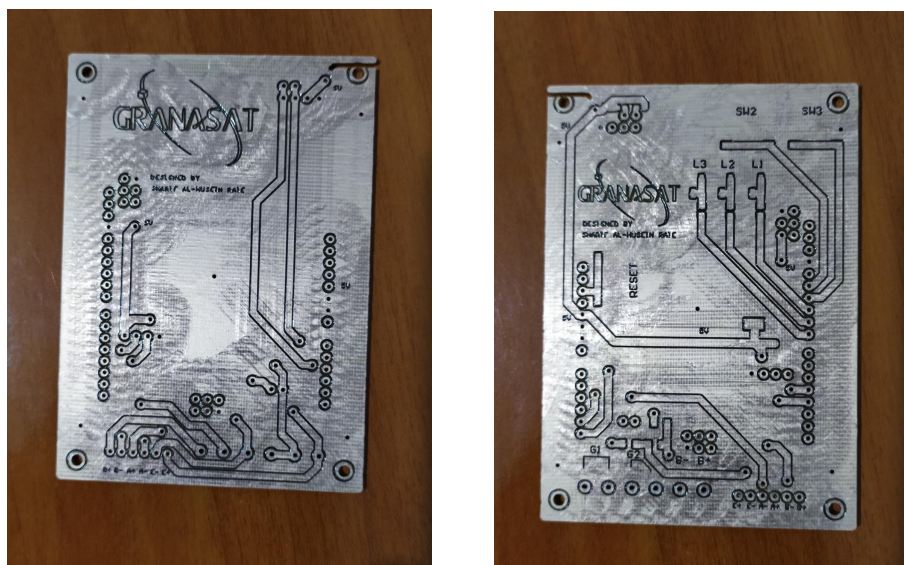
PCB manufactured, TOP and BOTTOM sides
